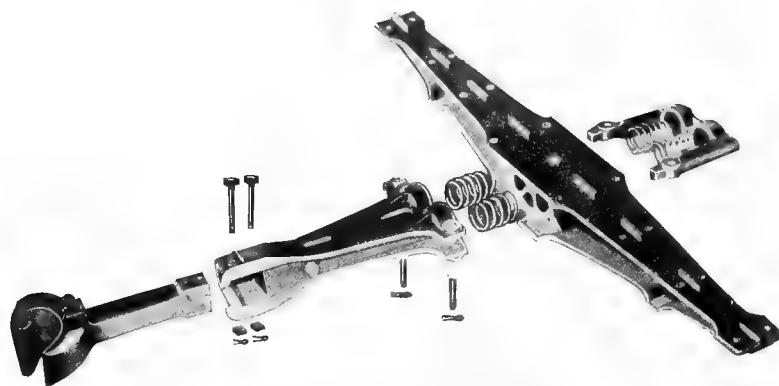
Parts of Commonwealth Cast Steel Transom Draft Gear for Wooden Cars. Commonwealth Steel Company.
